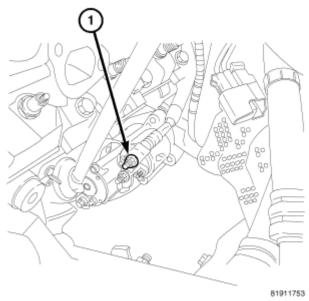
Starter Battery Cable 3.8L Courtesy of CHRYSLER LLC
